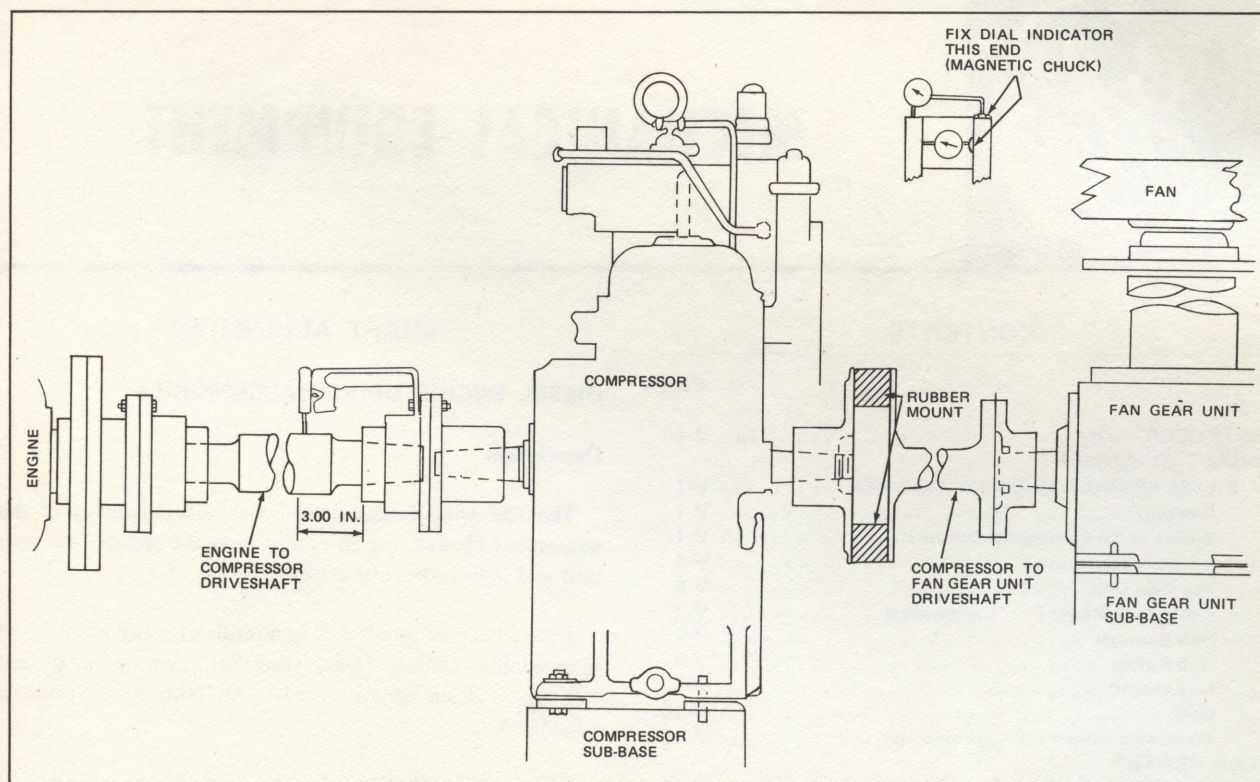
ENGINE, COMPRESSOR AND FAN GEAR UNIT ARRANGEMENT.
